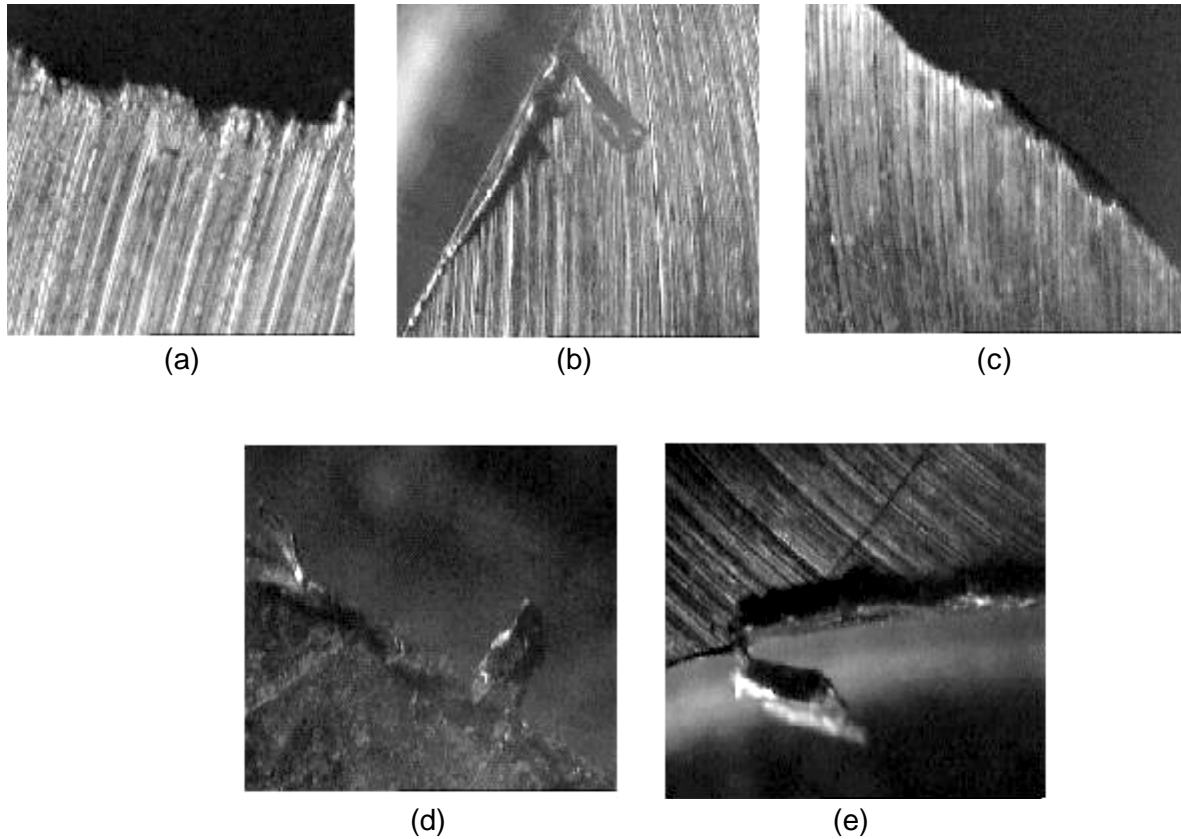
Typical microscopic view(X20) of burr at Experiment Set I at a feed of 0.1 mm/tooth with tool exit angle of a) 60° b) 70° c) 90° d) 105° and e) 115°
